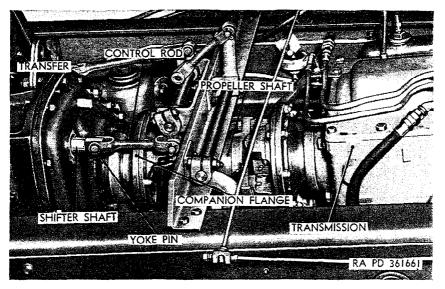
Transmission-to-transfer propeller shaft and shift linkage.
